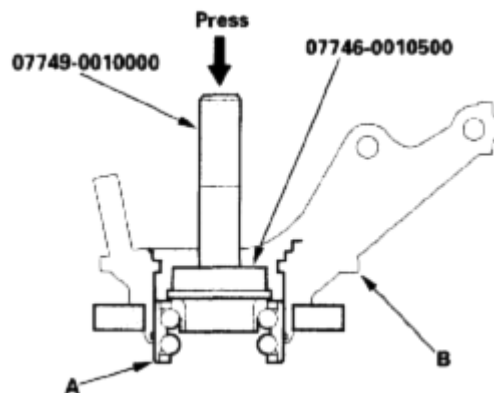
Pressing Wheel Bearing Out Of Knuckle Using Driver
